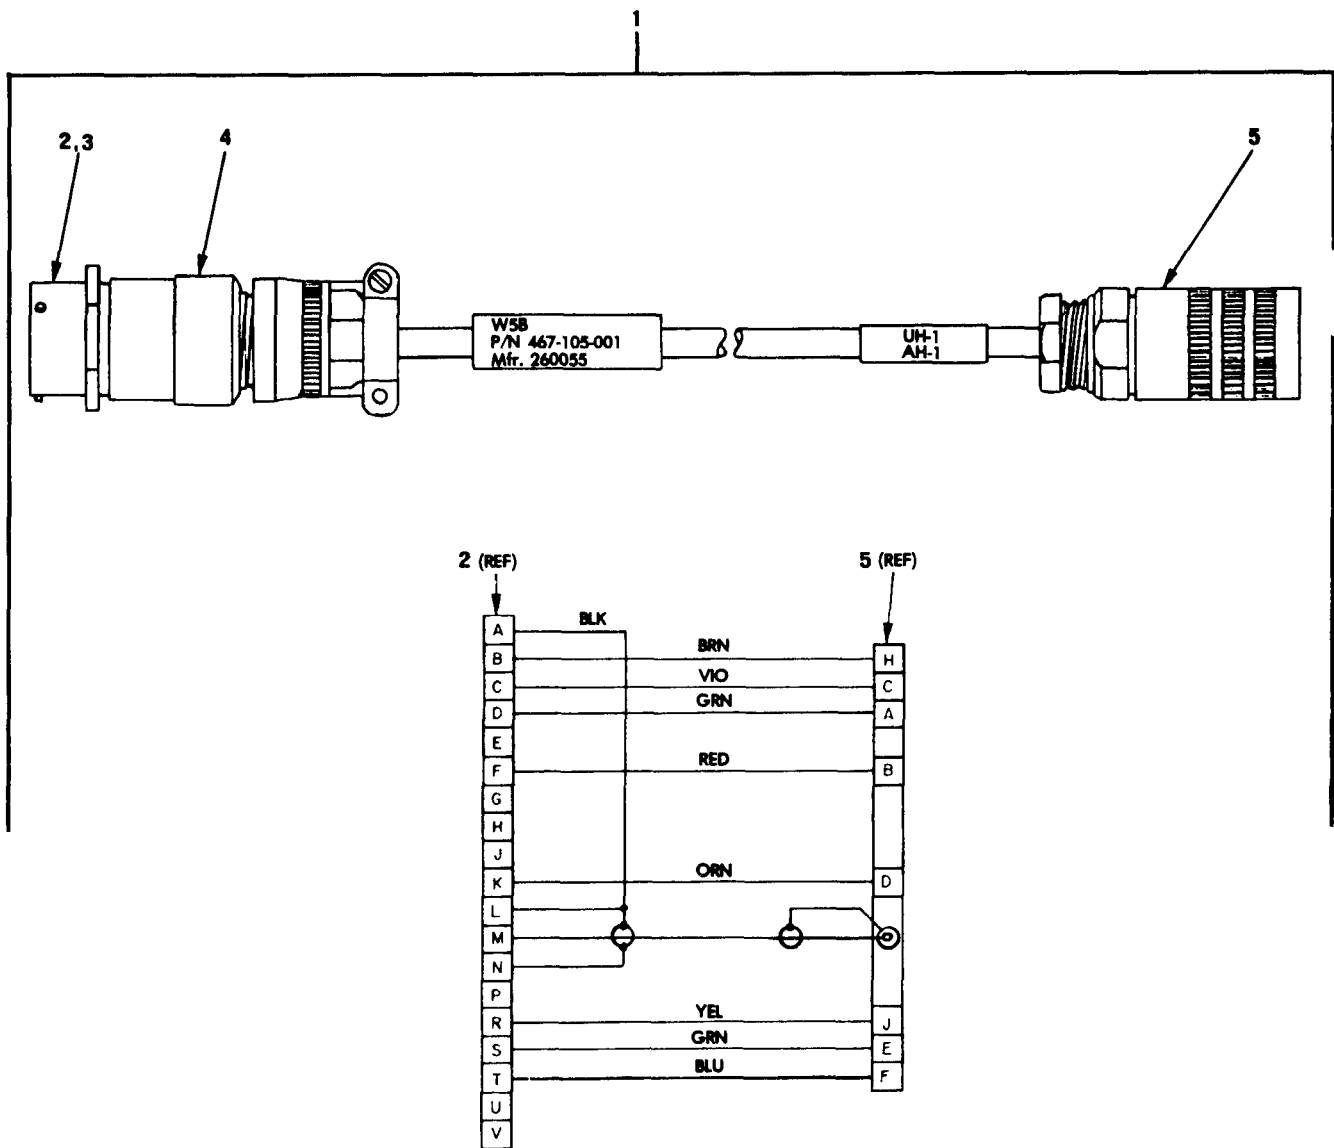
Adapter cable assembly W5B, part number 467-105-001
